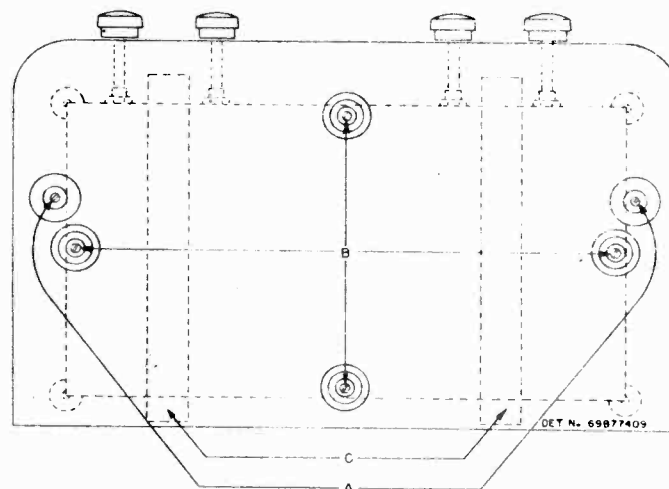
SHIPPING STRIP REMOVAL DETAIL
